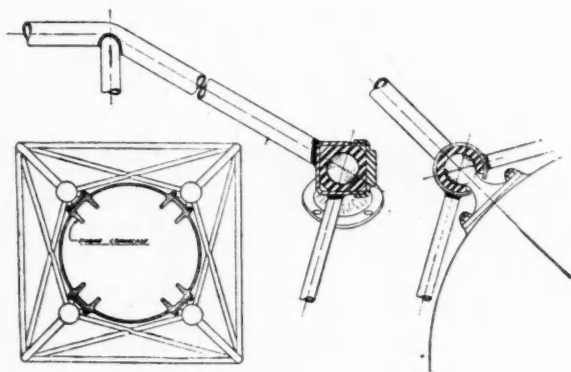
Four-point engine mount with rubber insulators at points of attachment to crankcase
